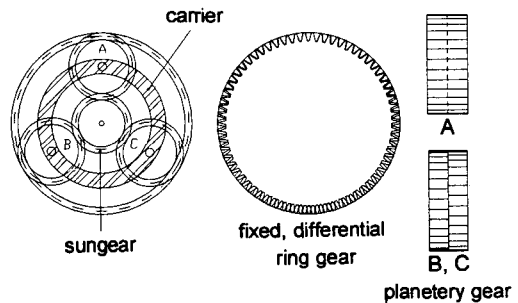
The schematic diagram of improved 1-tooth differential ring gear mechanism.
